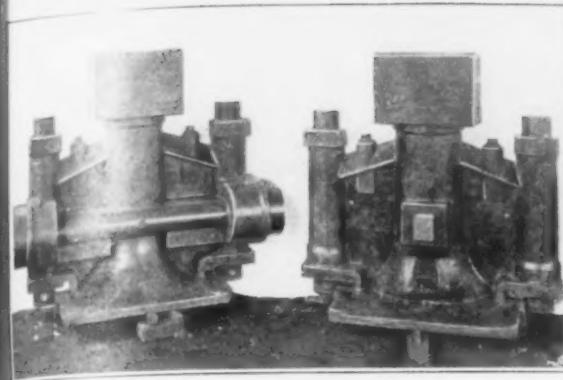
A Heavy Pattern Arranged for Hand Molding
